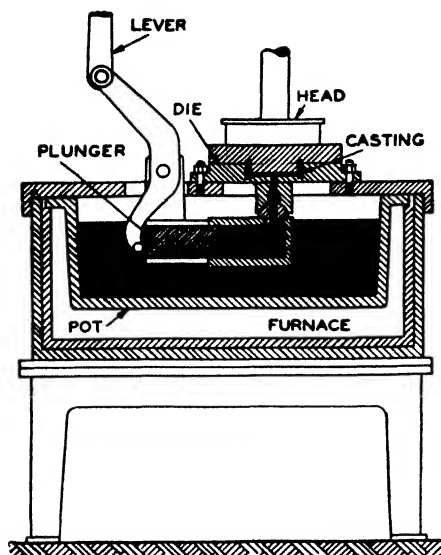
PLUNGER-TYPE DIE-CASTING MACHINE
